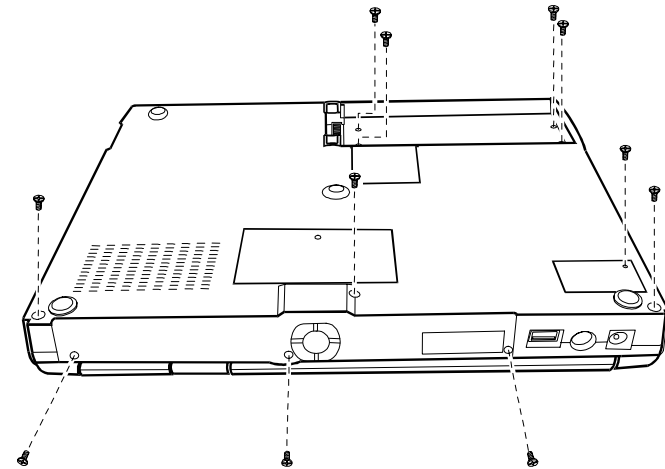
Removing Bottom Screws and Rear Side Screws
